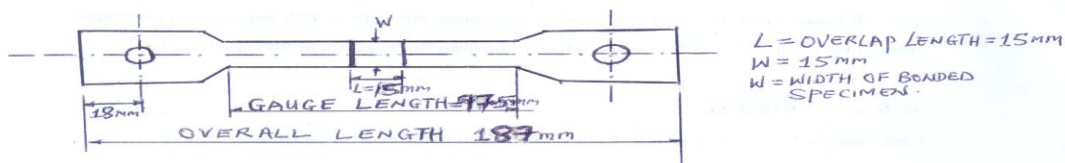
ALUMINUM TEST PIECE (SPECIMEN)
